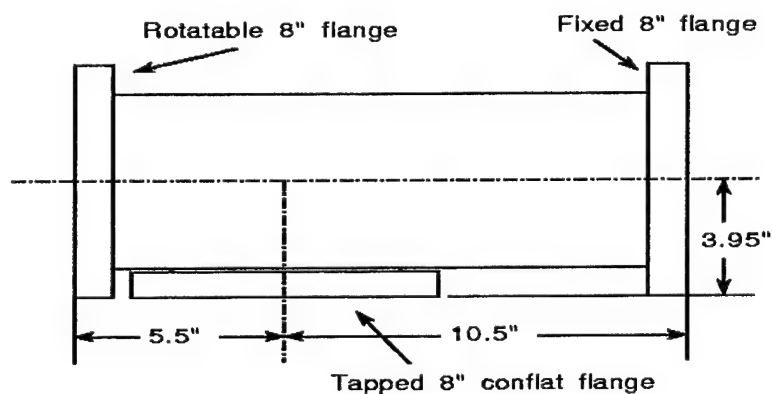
Schematic drawing of the housing of the diamond camera.
